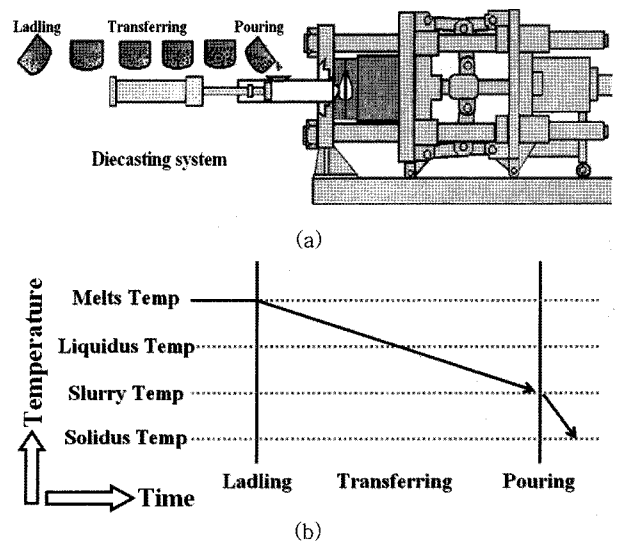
Schematics of (a) In-Ladle DTC rheocasting process in diecasting machine and (b) In-Ladle DTC rheocasting thermal procedure.
